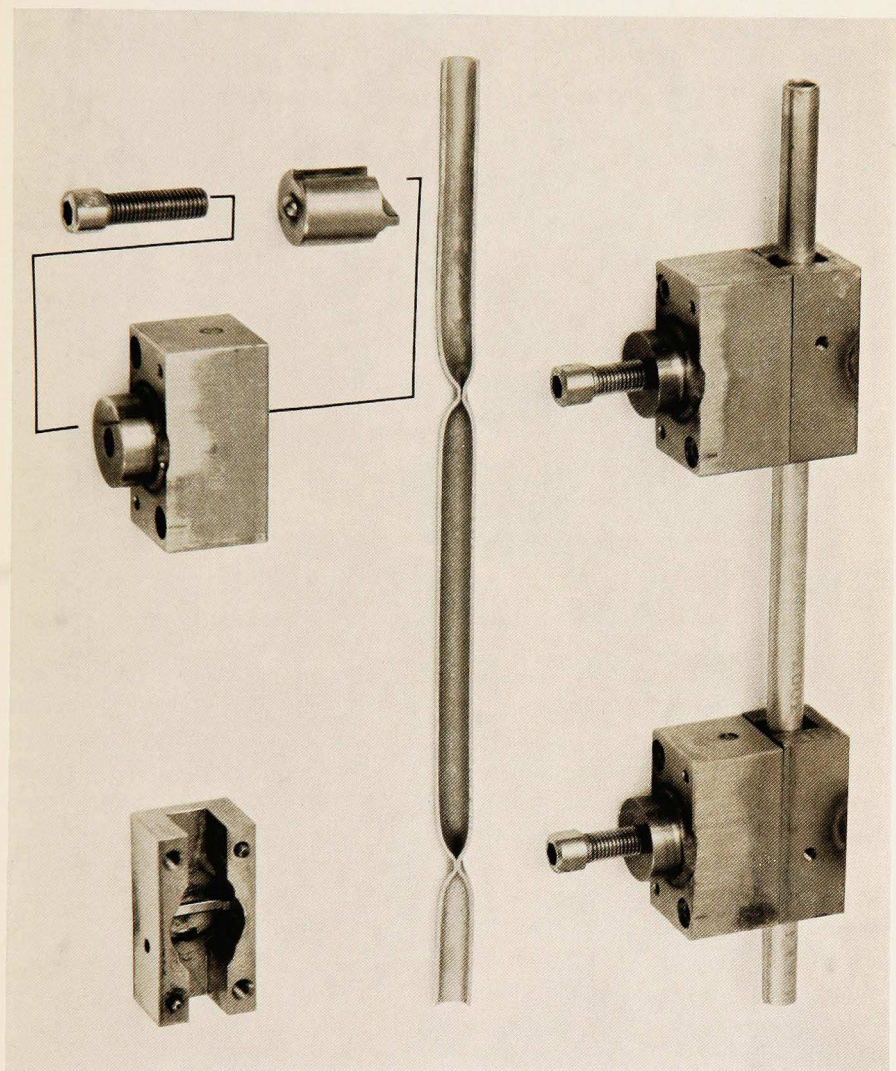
Closing mechanism of the sampler. LEFT: parts of the wedge assembly. CENTER: cross section of a pinched aluminum tube. RIGHT: the sampler and wedge assembly.
